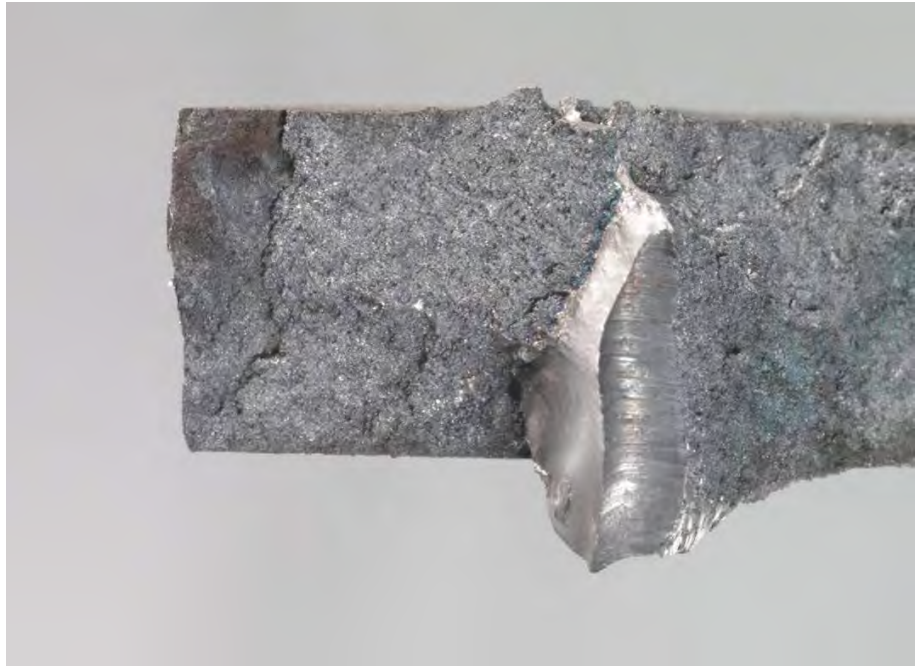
Close-up of surface of fracture through crack No. 2 from SID 14875 subsegment "C4" shown in Fig. 168.
